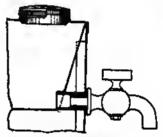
Part Section of Boiler for Picnio Outfit.
